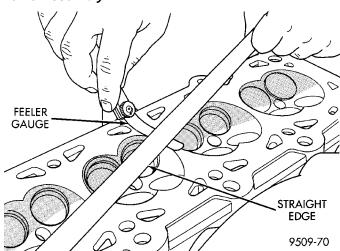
Checking Cylinder Head Flatness TIMING BELT COVER
